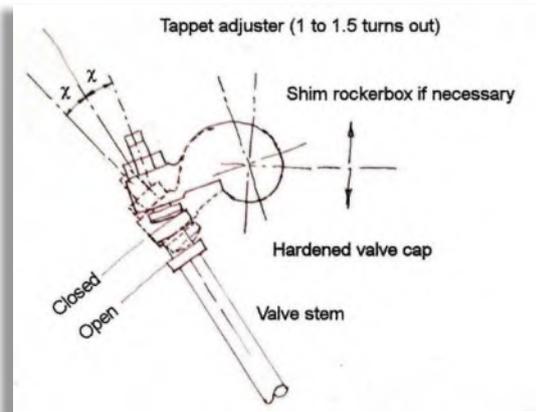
Sketch of the rocker geometry when it works nominally. Courtesy Chris Odling.
